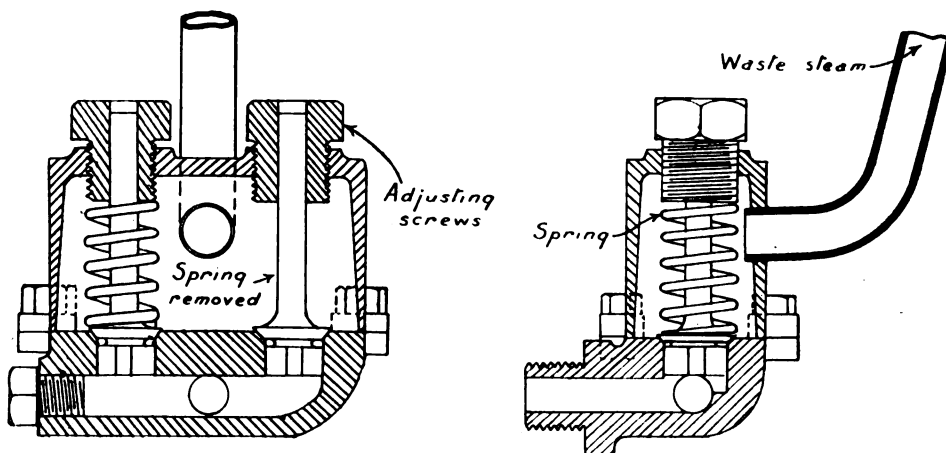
TWO SECTIONAL ELEVATIONS OF SAFETY VALVES.
